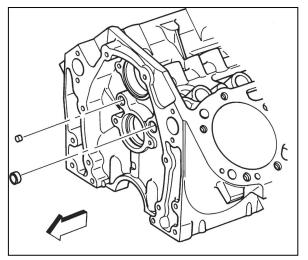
Front Cylinder Block Oil Gallery Plugs
